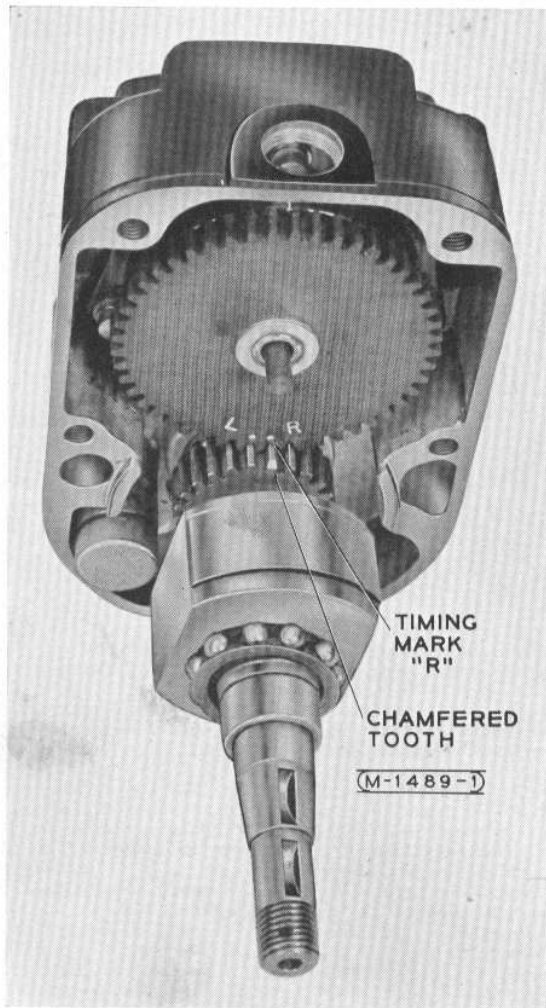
A. Correct Meshing of Distributor Gears—Clockwise Magneto
